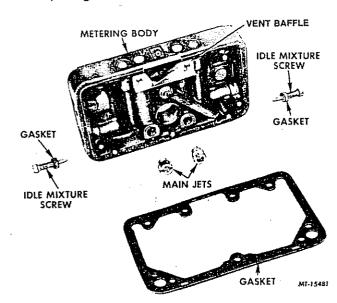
PRIMARY METERING BODY, FUEL BOWL SIDE (DISASSEMBLED VIEW)
